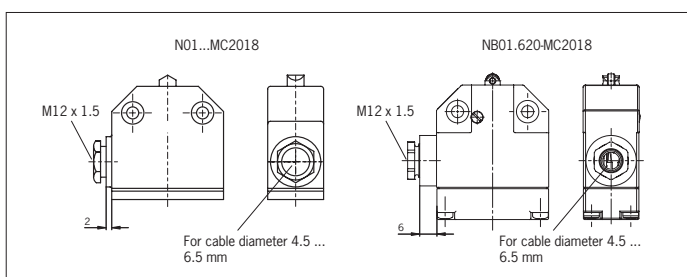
Dimension drawing N01...MC2018/NB01.620-MC2018 with special cable gland
